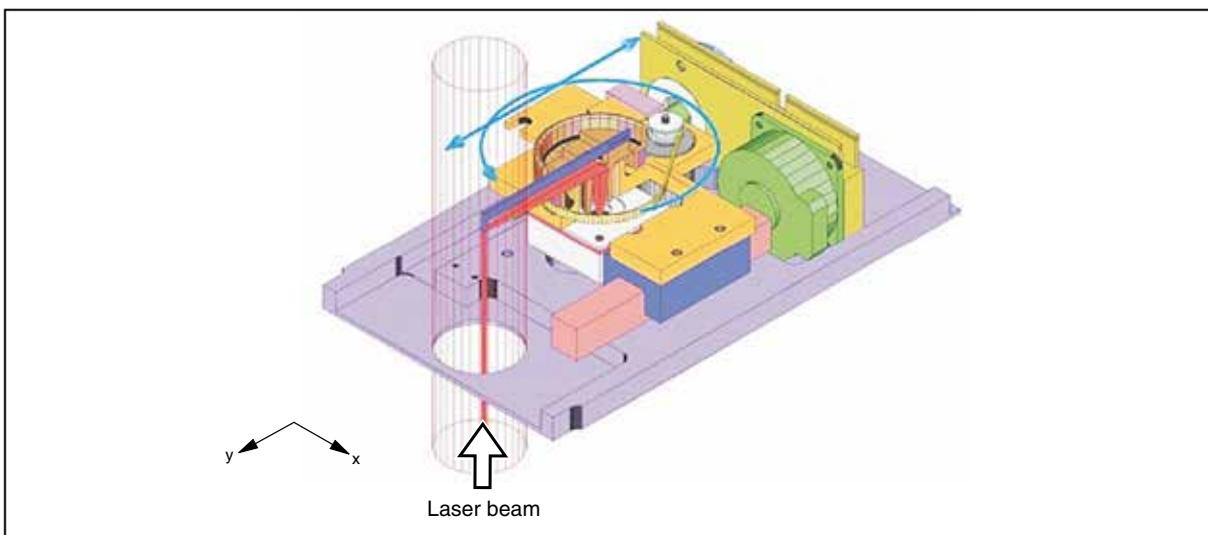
Optomechanical assembly of the BeamMonitor
